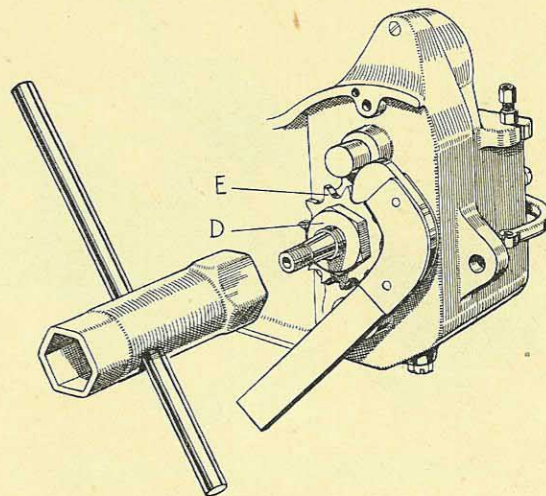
REMOVAL AND REPLACEMENT OF HIGH-GEAR PINION.
